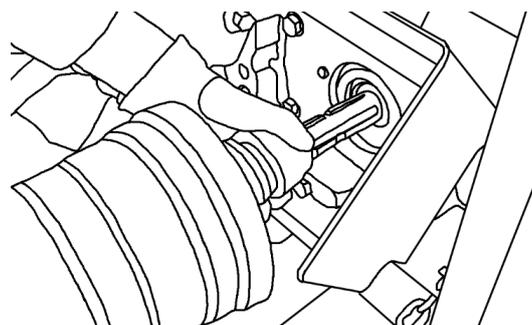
Multicut Input Shaft Fitting & Removal
